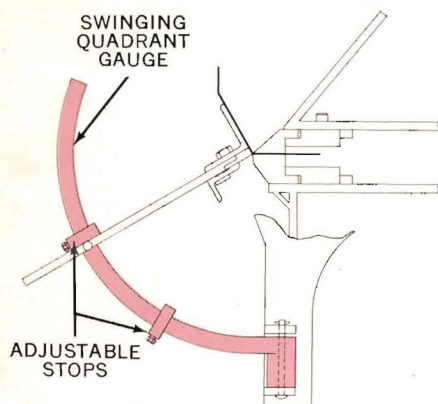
Cross Section, Swinging Quadrant Gauge with Adjustable Stops
